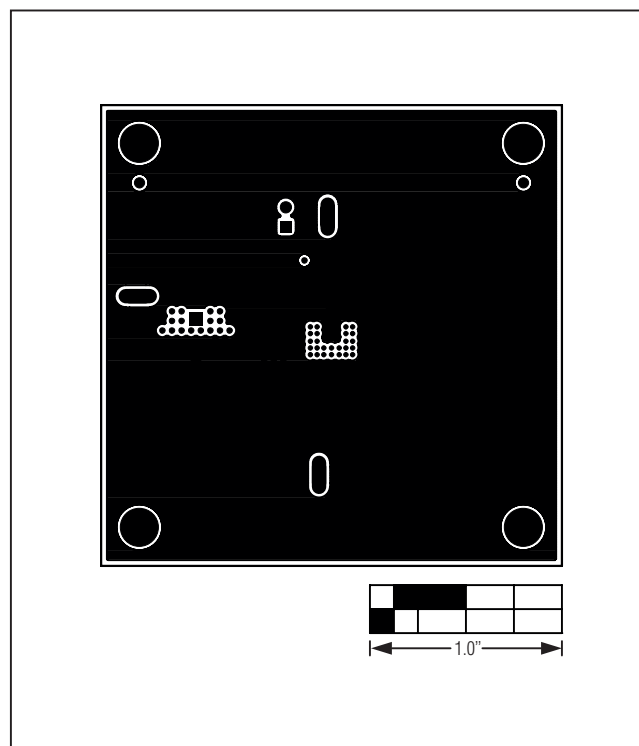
MAX15101/MAX15102/MAX15103 EV Kits PCB Layout—Inner Layer 2 GND
